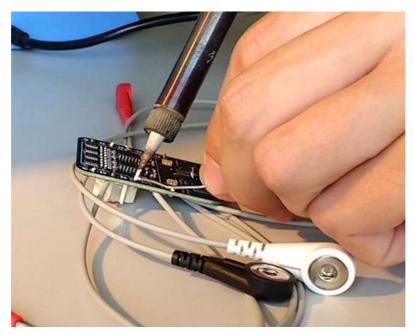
Screenshot of the video tutorial, showing how to solder the cables to the Traumschreiber board.
